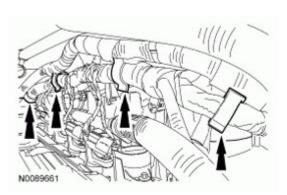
Locating HO2S Sensor Electrical Wiring Harness Retainer Courtesy of FORD MOTOR CO.
